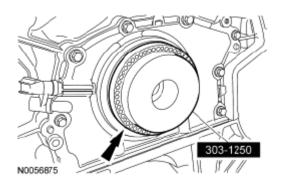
Identifying Rear Main Seal Installer On Crankshaft Courtesy of FORD MOTOR CO.
